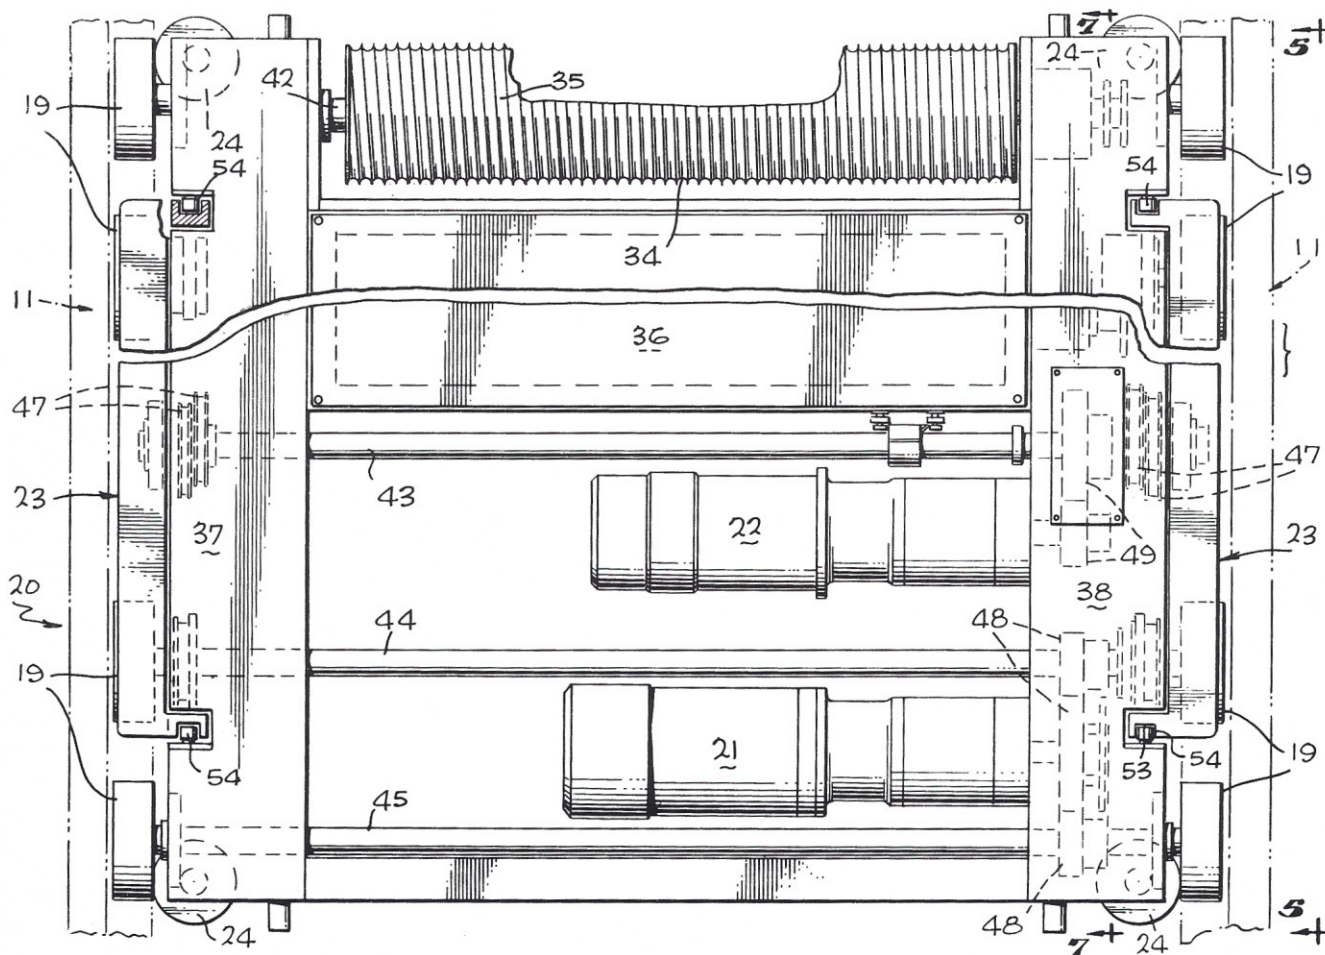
Helical grooves are built into the cable drum. These grooves automatically guide the cable into the proper winding position.
